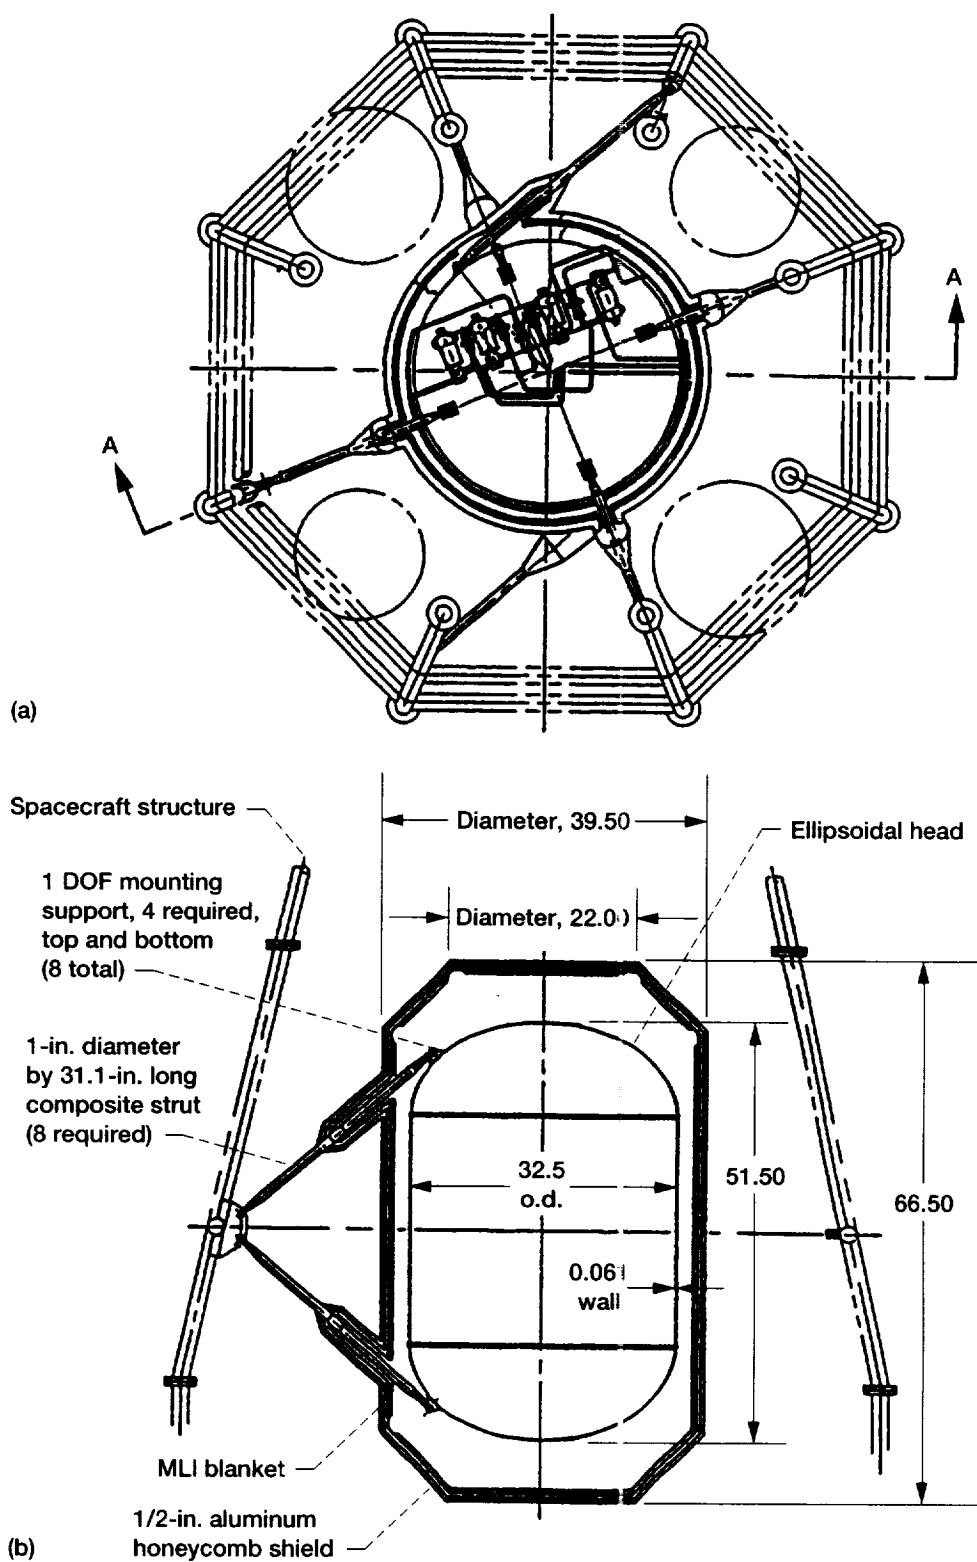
Large receiver tank module. Dimensions are in inches. (a) Top view. (b) Side view of (A-A).
